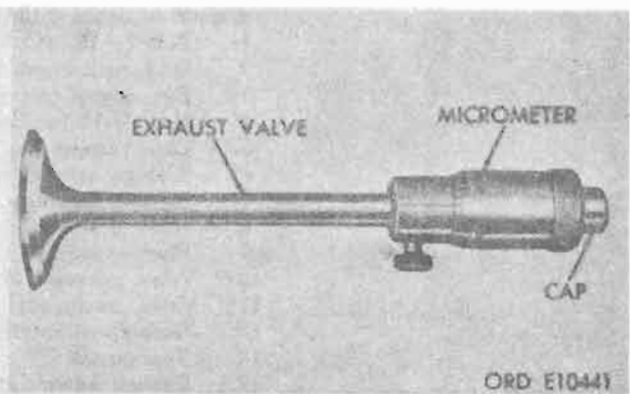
Typical gage for checking valve stem-to-cap clearance.
